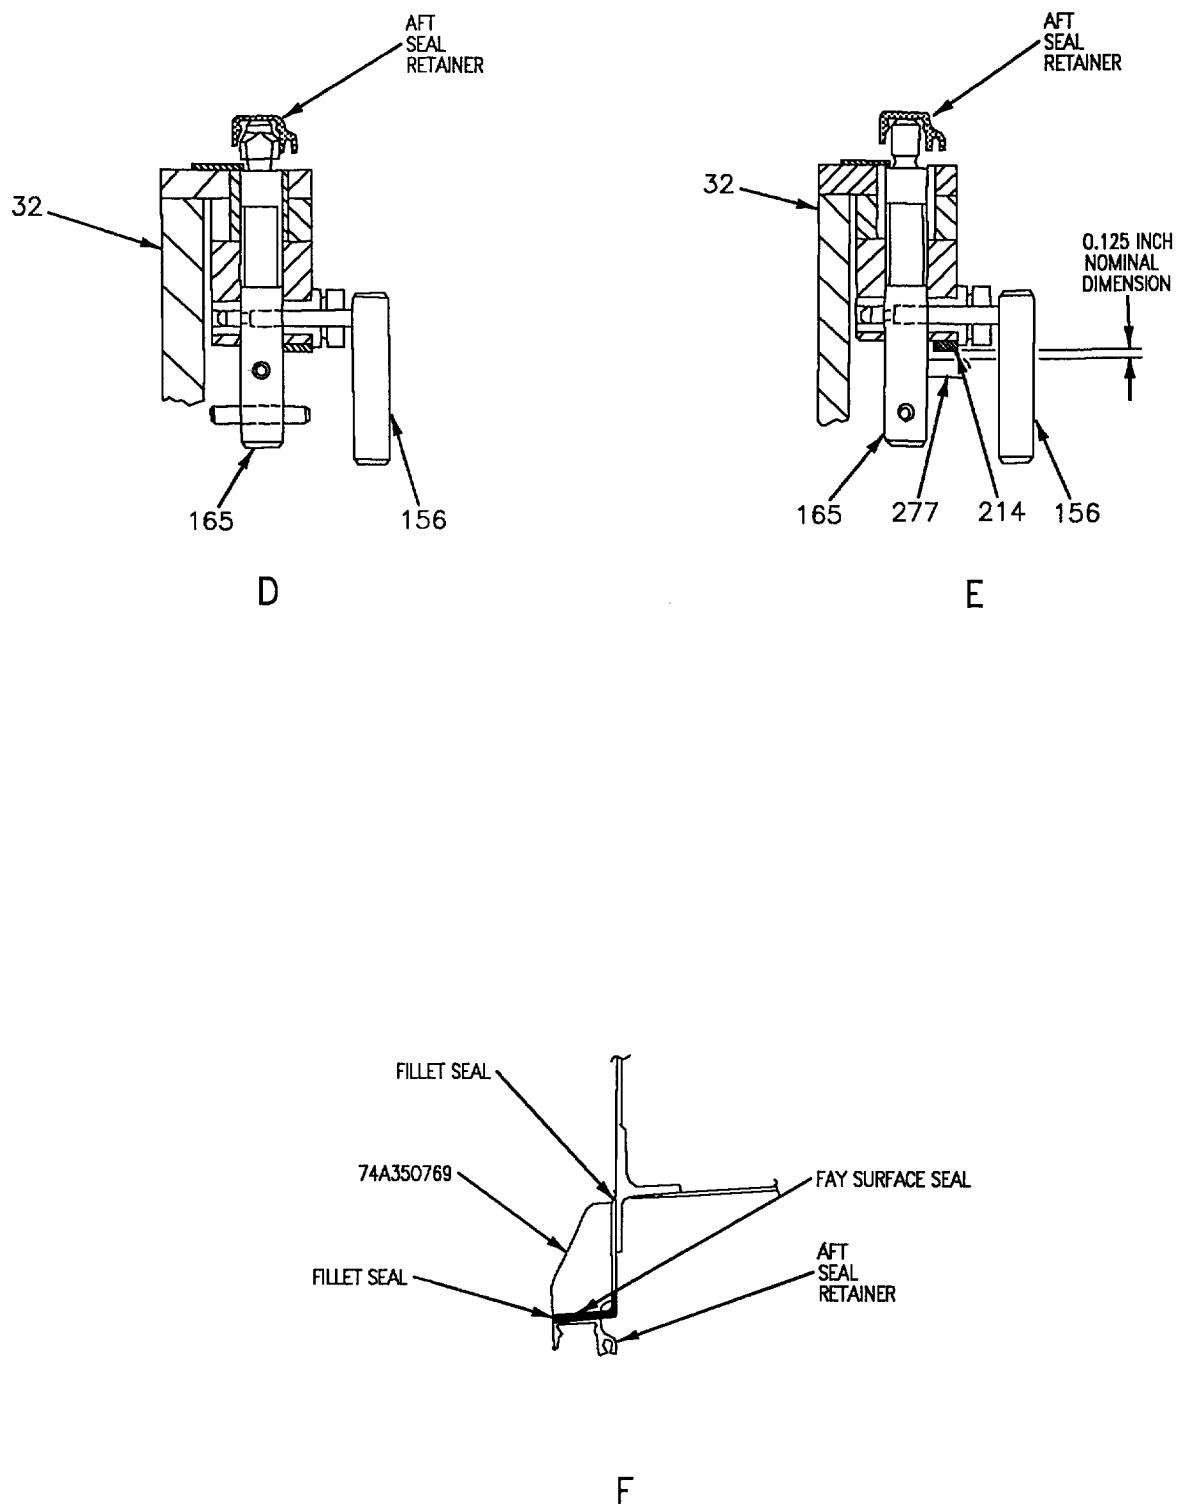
Inspection or Replacement - Aft Seal Retainer (Sheet 3)
